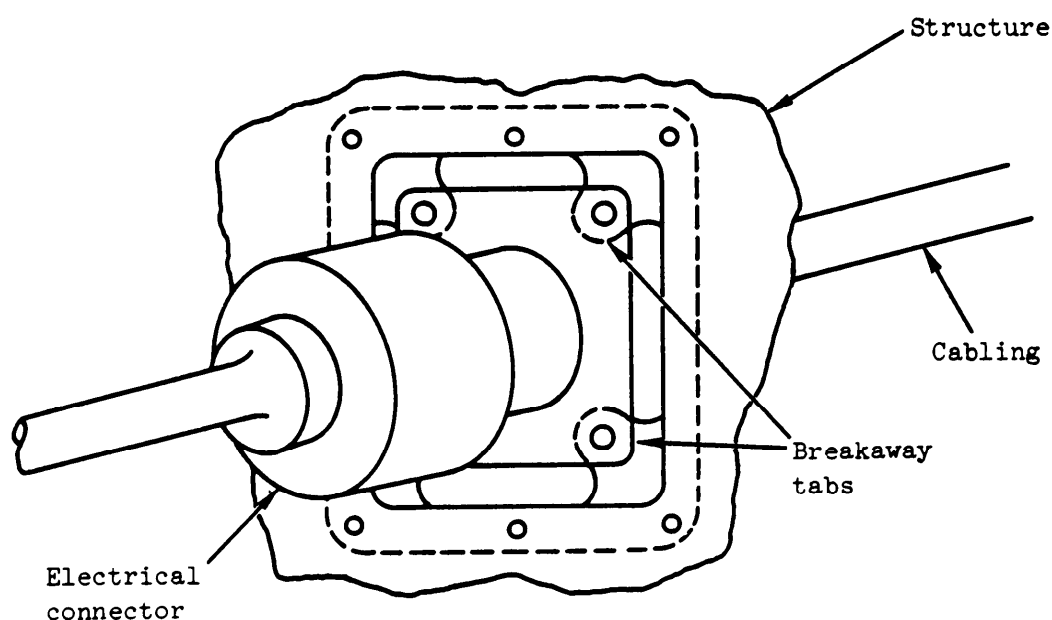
Cabling bulkhead connector breakaway fitting.
